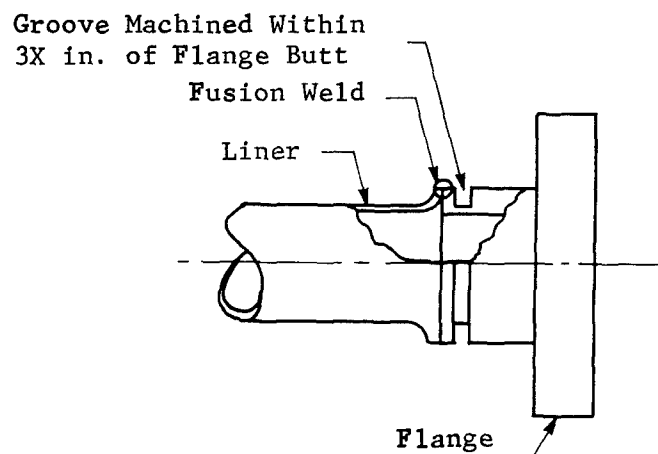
Fusion Welding Liner to End Fitting
